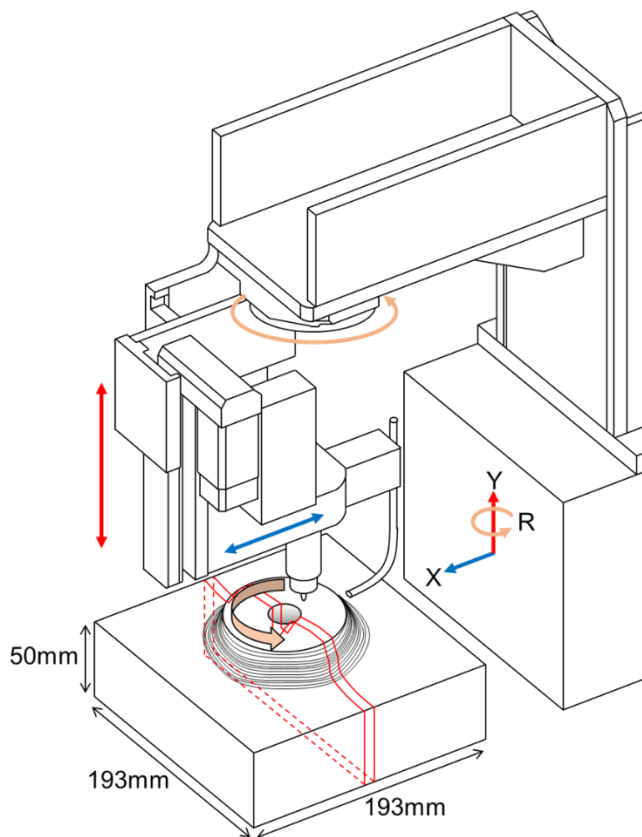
Schematic representation of welding manipulator[105]
